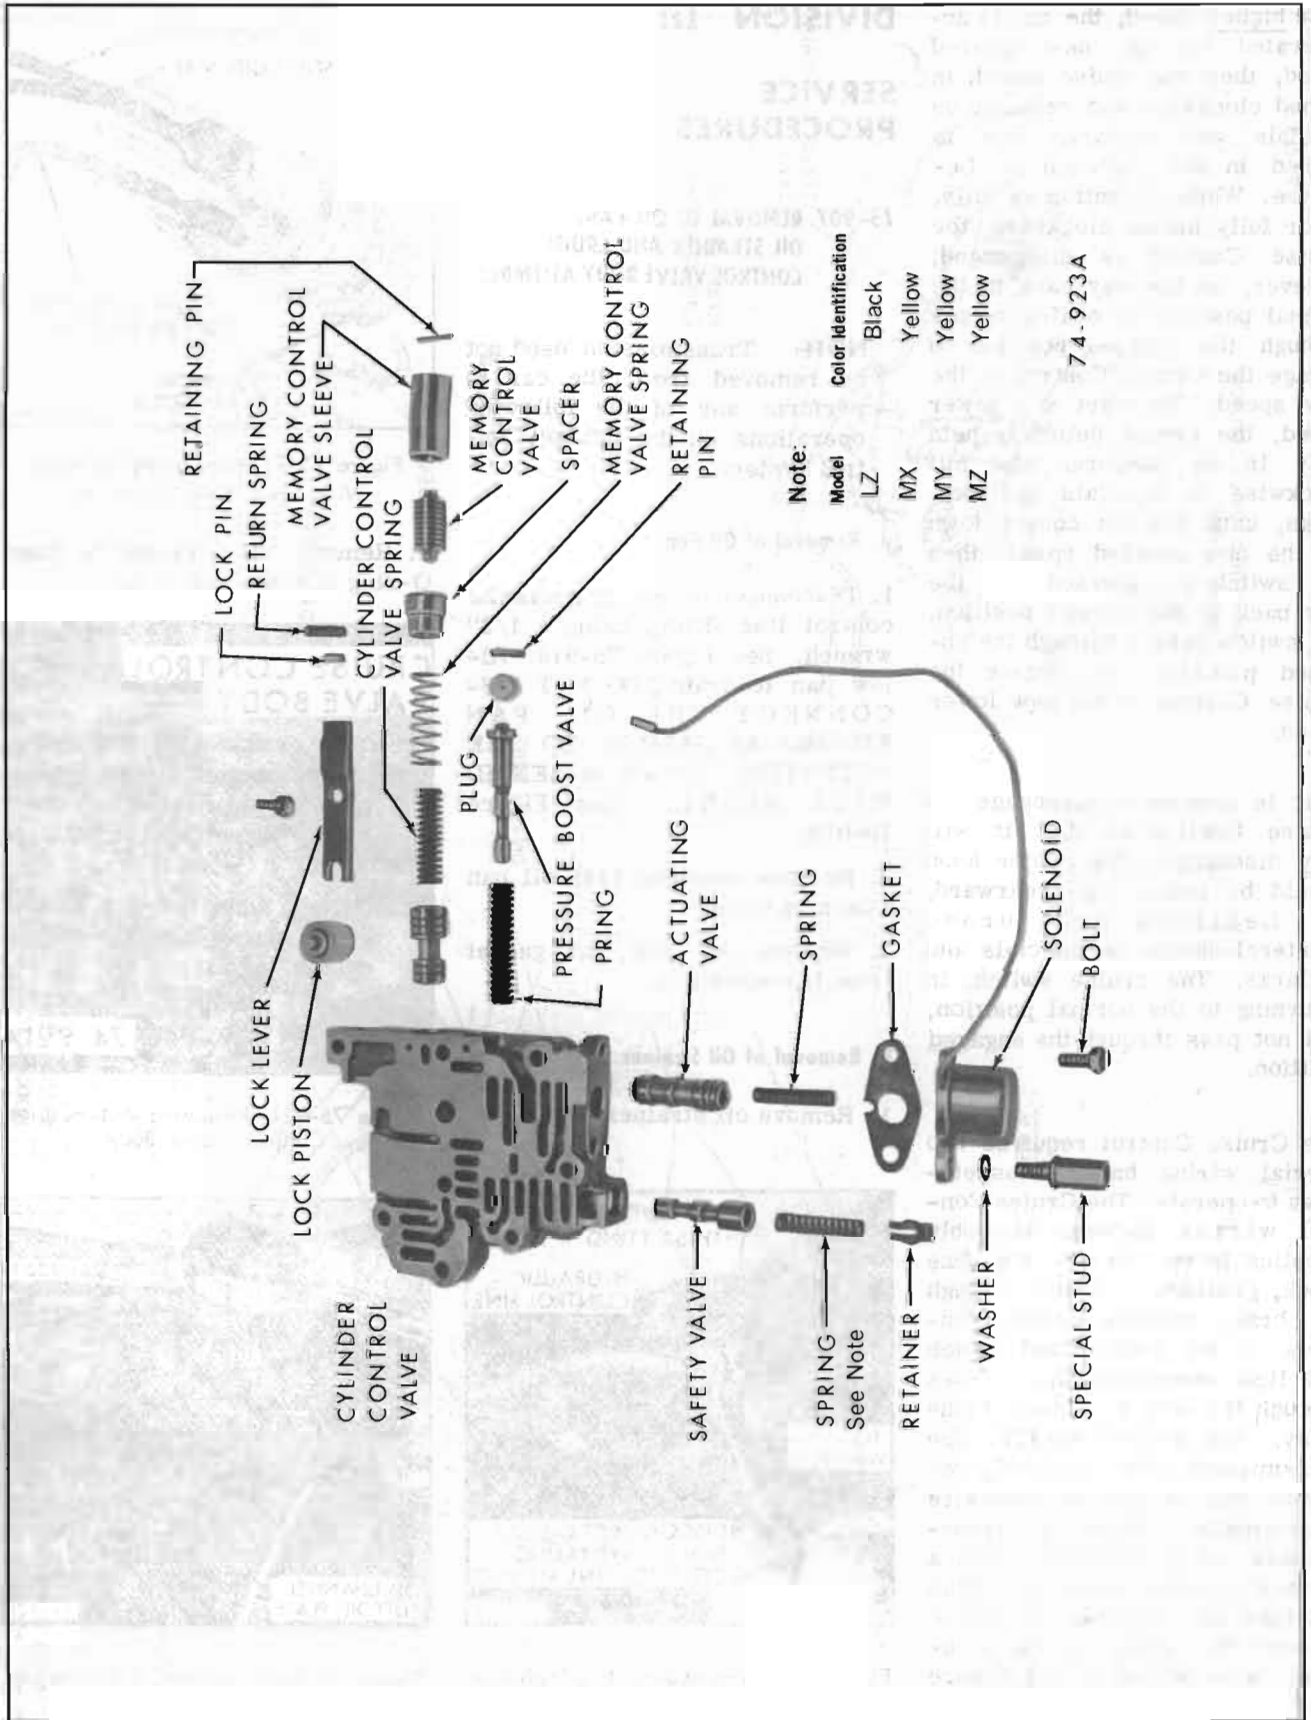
Exploded View of Auto-Cruise Control Valve Body
